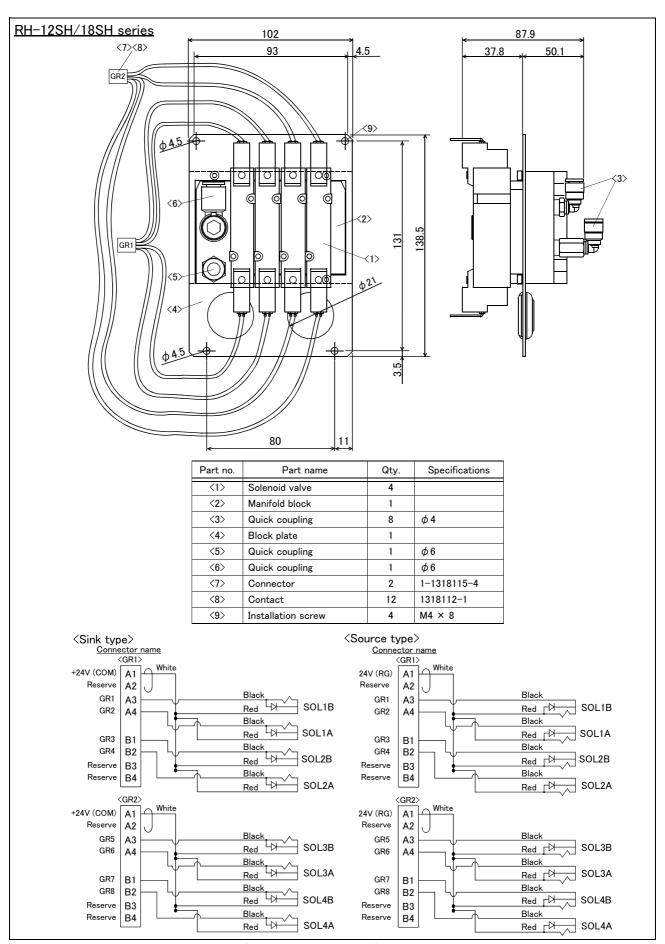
Outside dimensional drawing(RH-12SH/18SH series)
